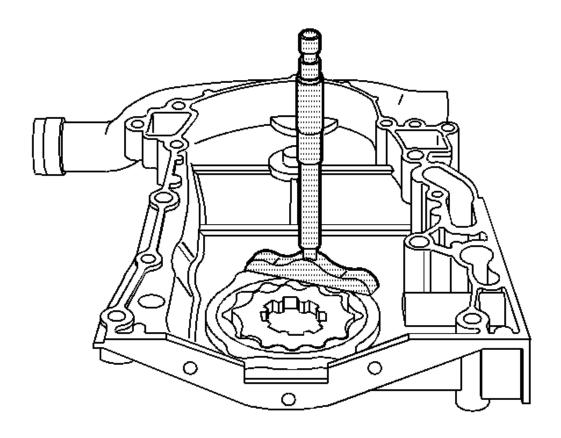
Measuring Outer Oil Pump Gear Diameter Clearance Courtesy of GENERAL MOTORS CORP.
